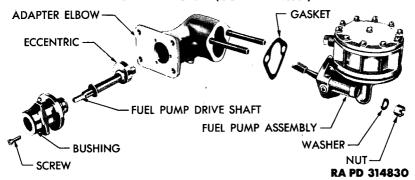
Fuel Pump Adapter Elbow — Disassembled
